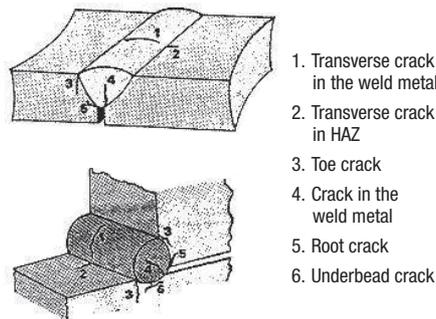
Frequent locations of cold cracks in groove and fillet welds
